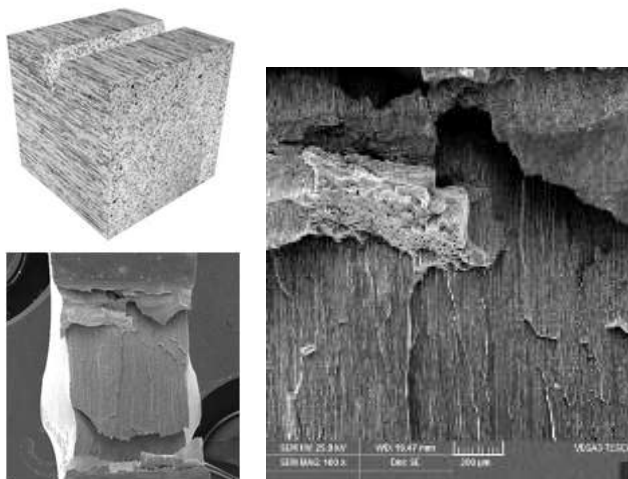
The 3D reconstruction of texture MA957 and fracture surface of mini Charpy specimen exposed to He 720°C and impact tested at -80°C
